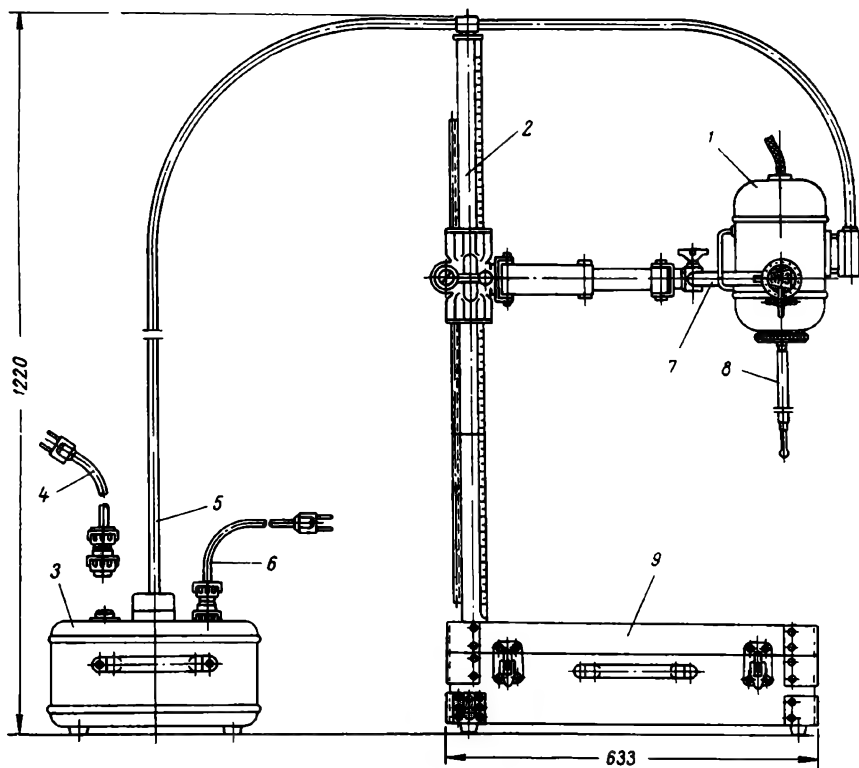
Type ГYII-Tu-0.5-1 gamma-inspection unit:
